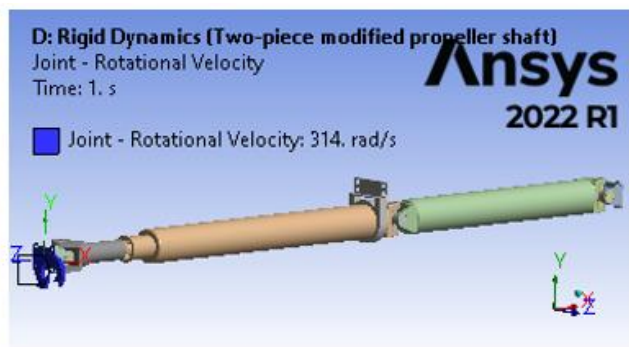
Joint connection of the one-piece modified model with center bearing
